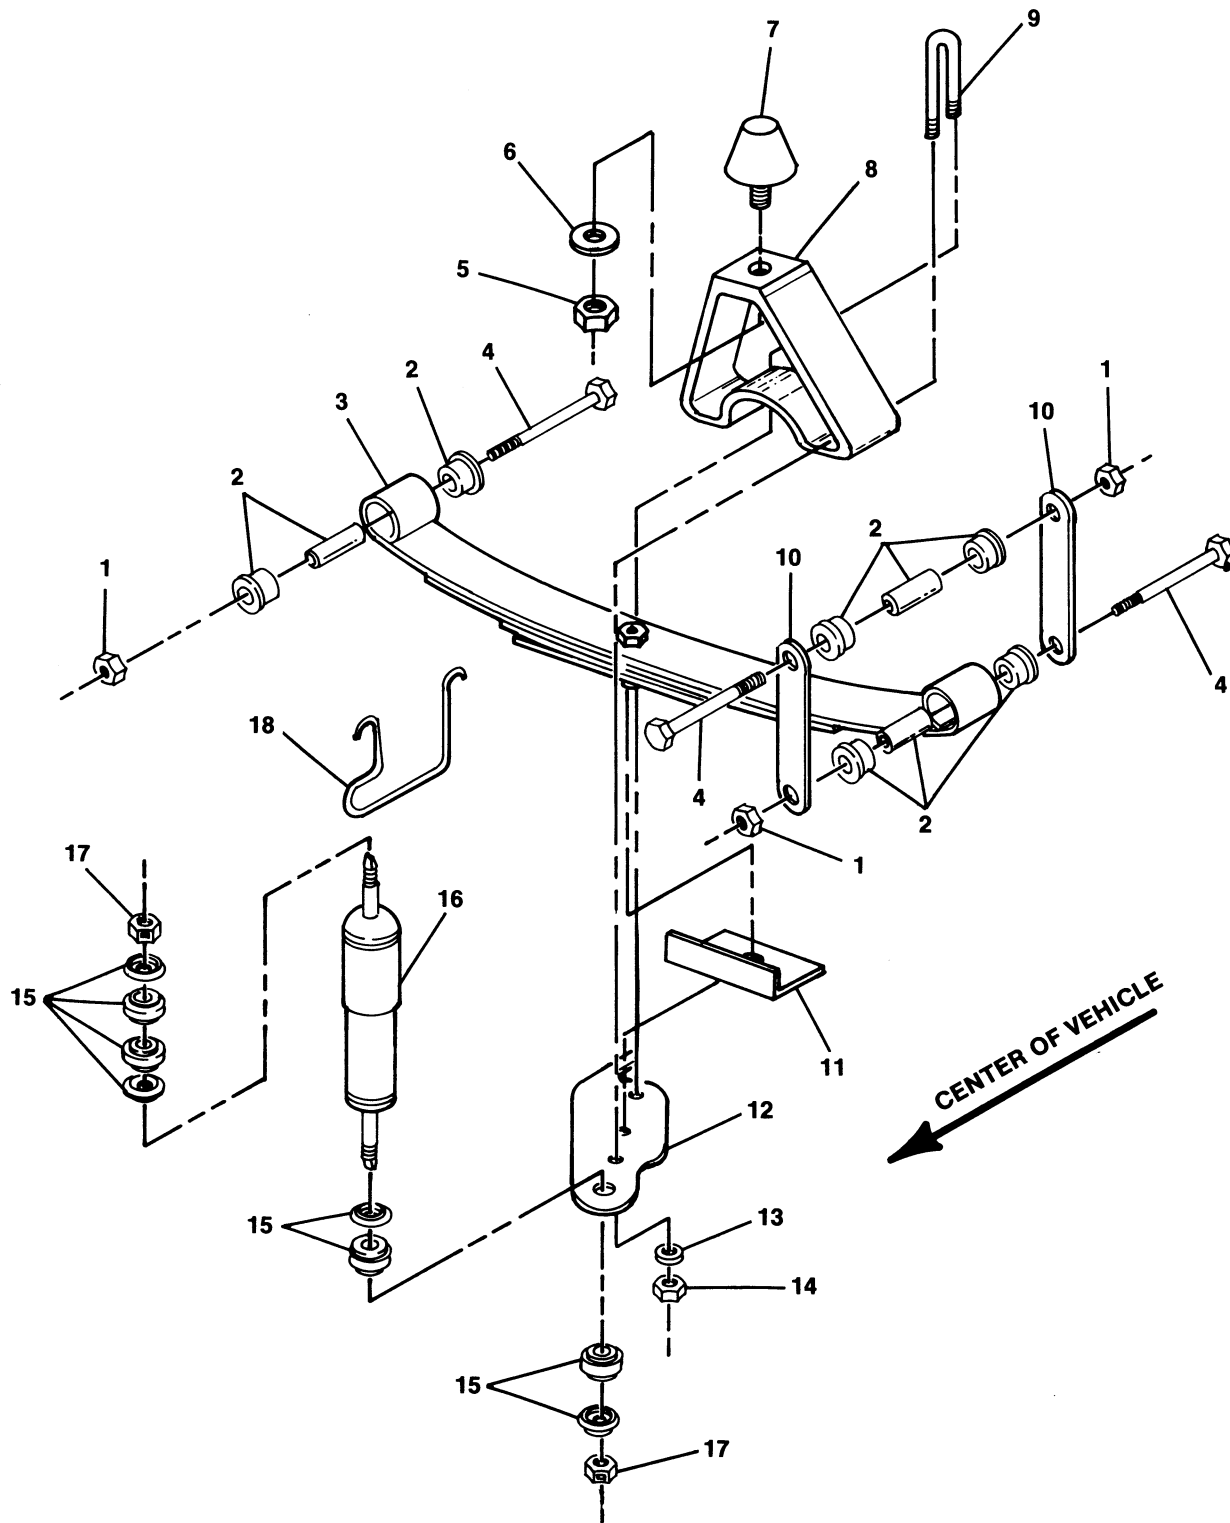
REAR SUSPENSION ASSEMBLY. SEE LIST 3-4.
